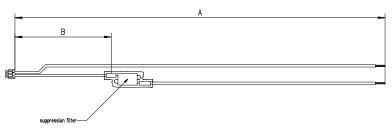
Power Supply Cable with Filtercoil ETV2
